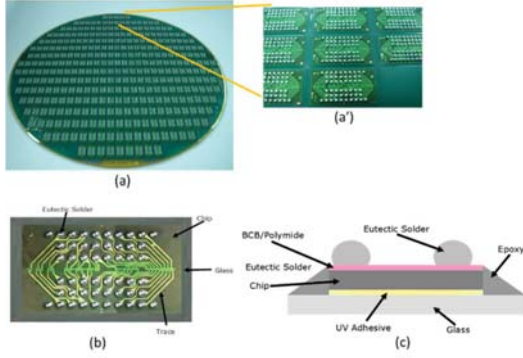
Glass distributed wafer level packaging (a) wafer view with the detail (a'), (b) single device (c) schematic cross-section [4, 5].
